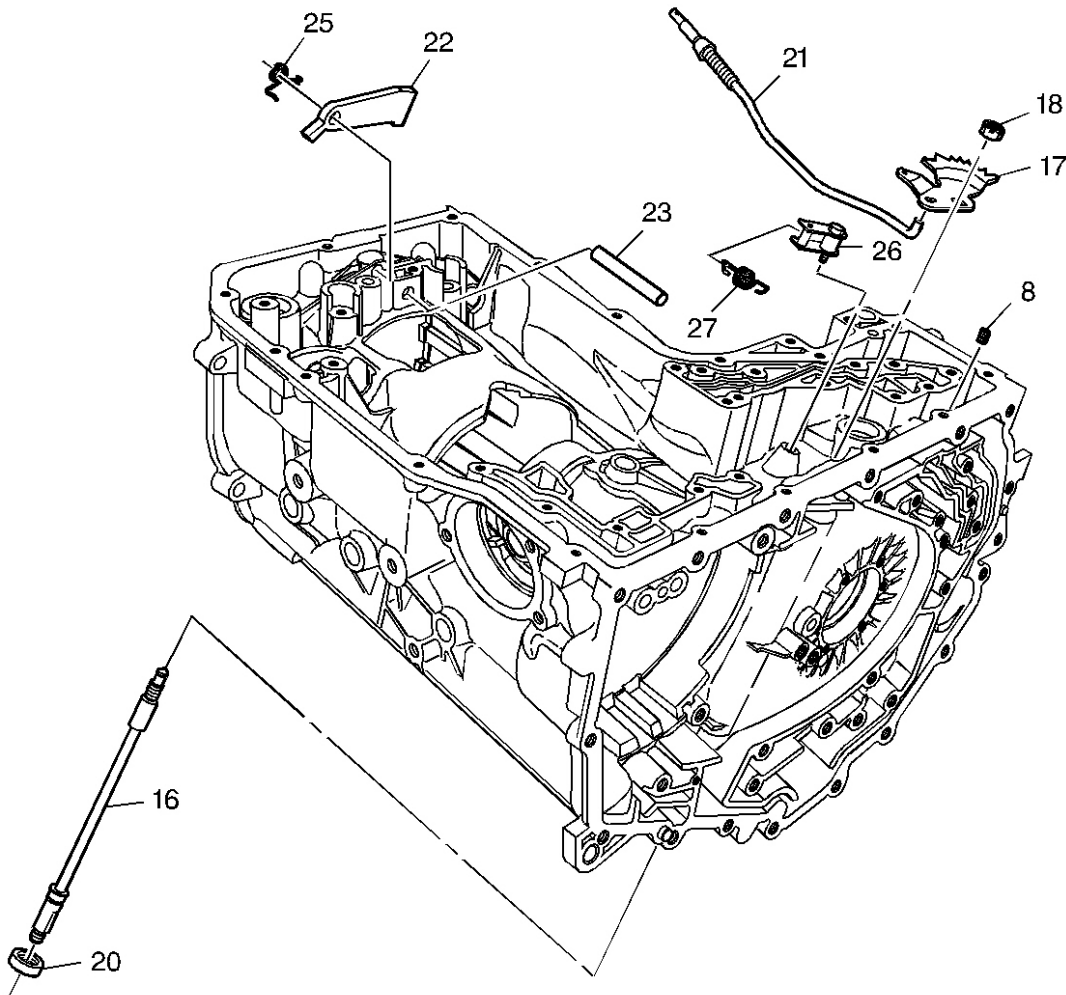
Parking Pawl, Actuator Assembly and Manual Shaft Disassembled View
